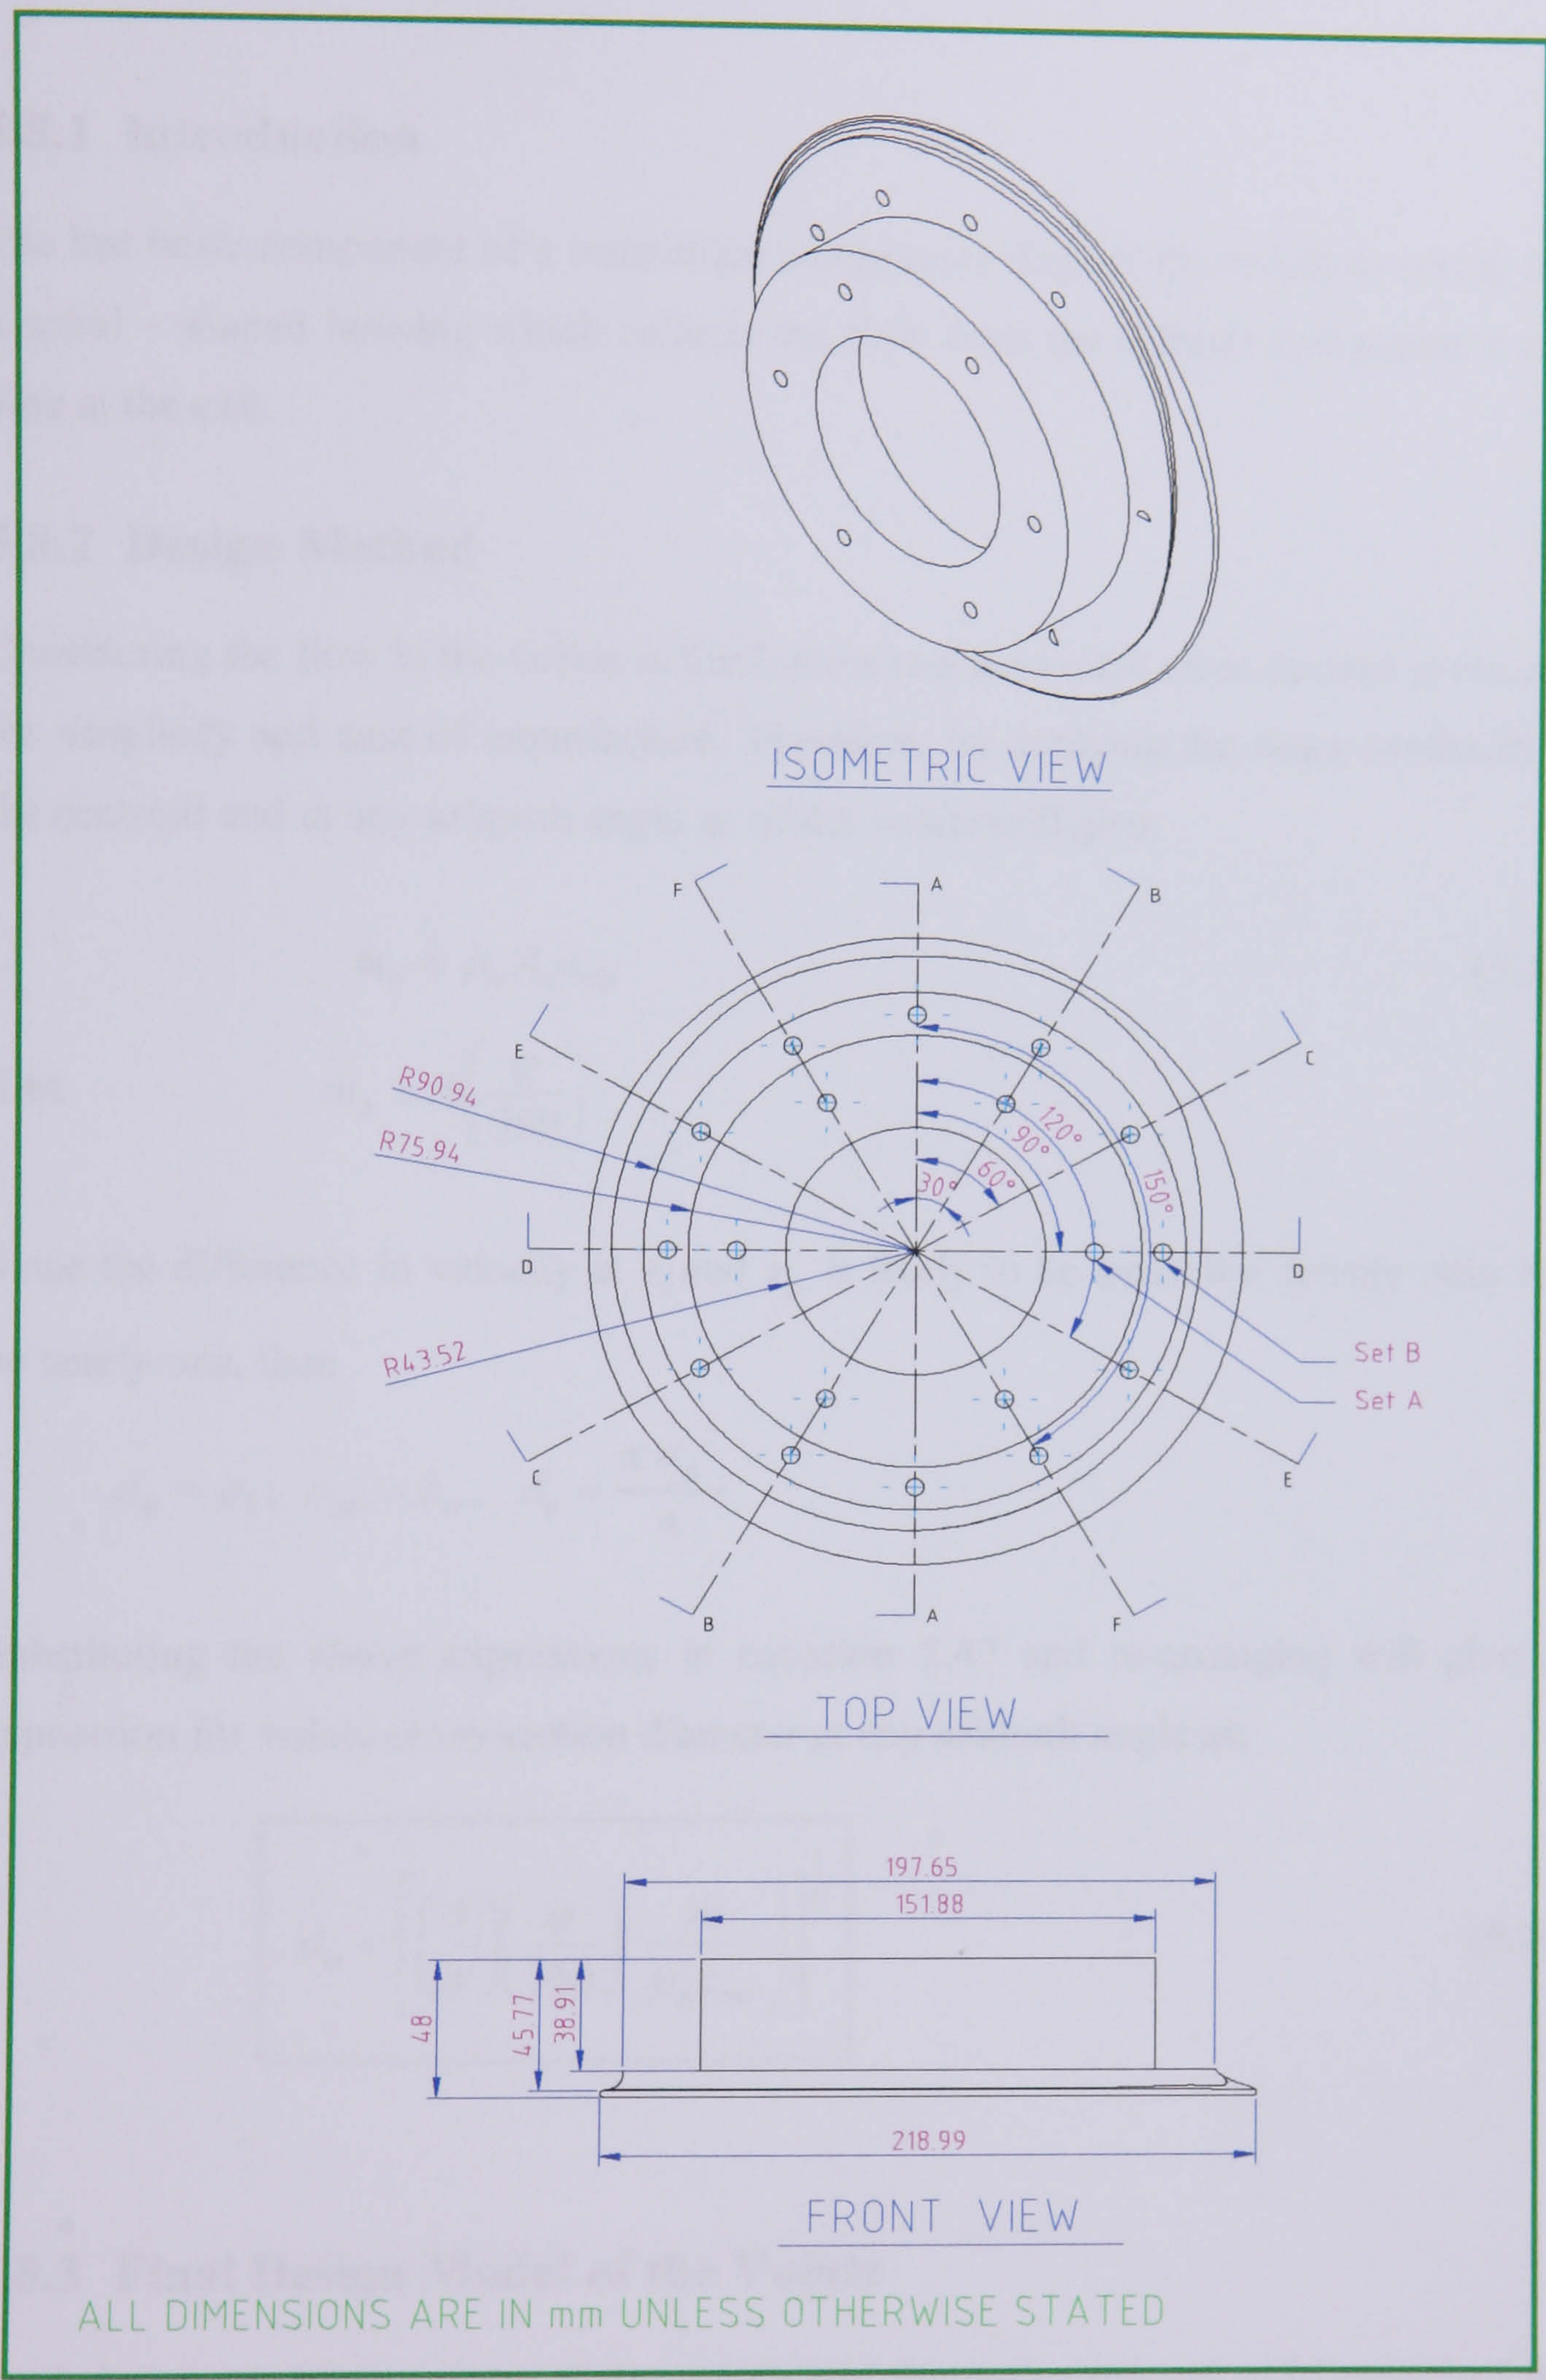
DETAIL DESIGN DRAWINGS OF THE VANELESS DIFFUSER
